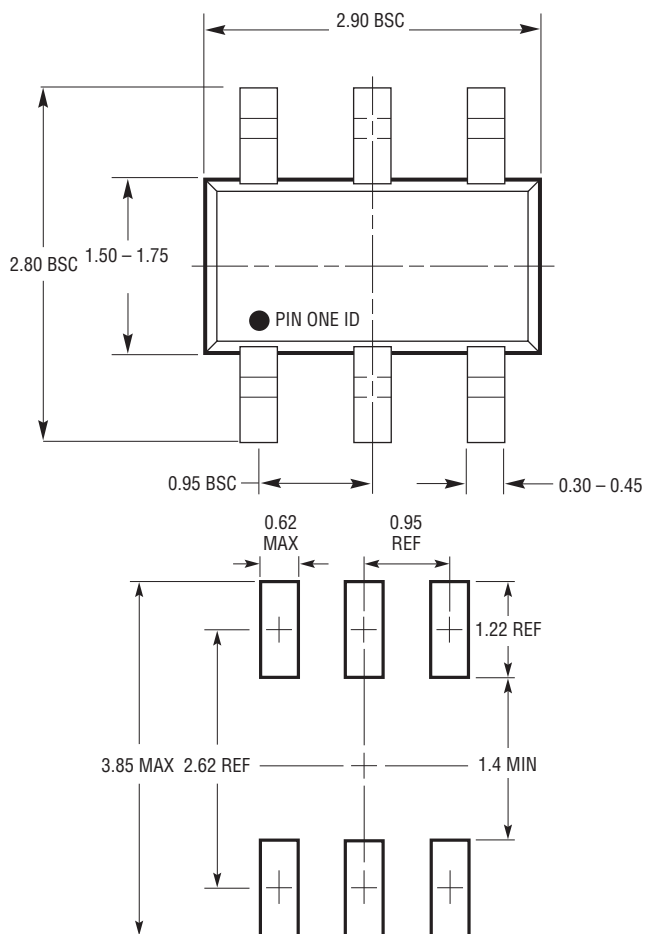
MPD0710S2 Outline Drawing and Recommended PCB Layout
